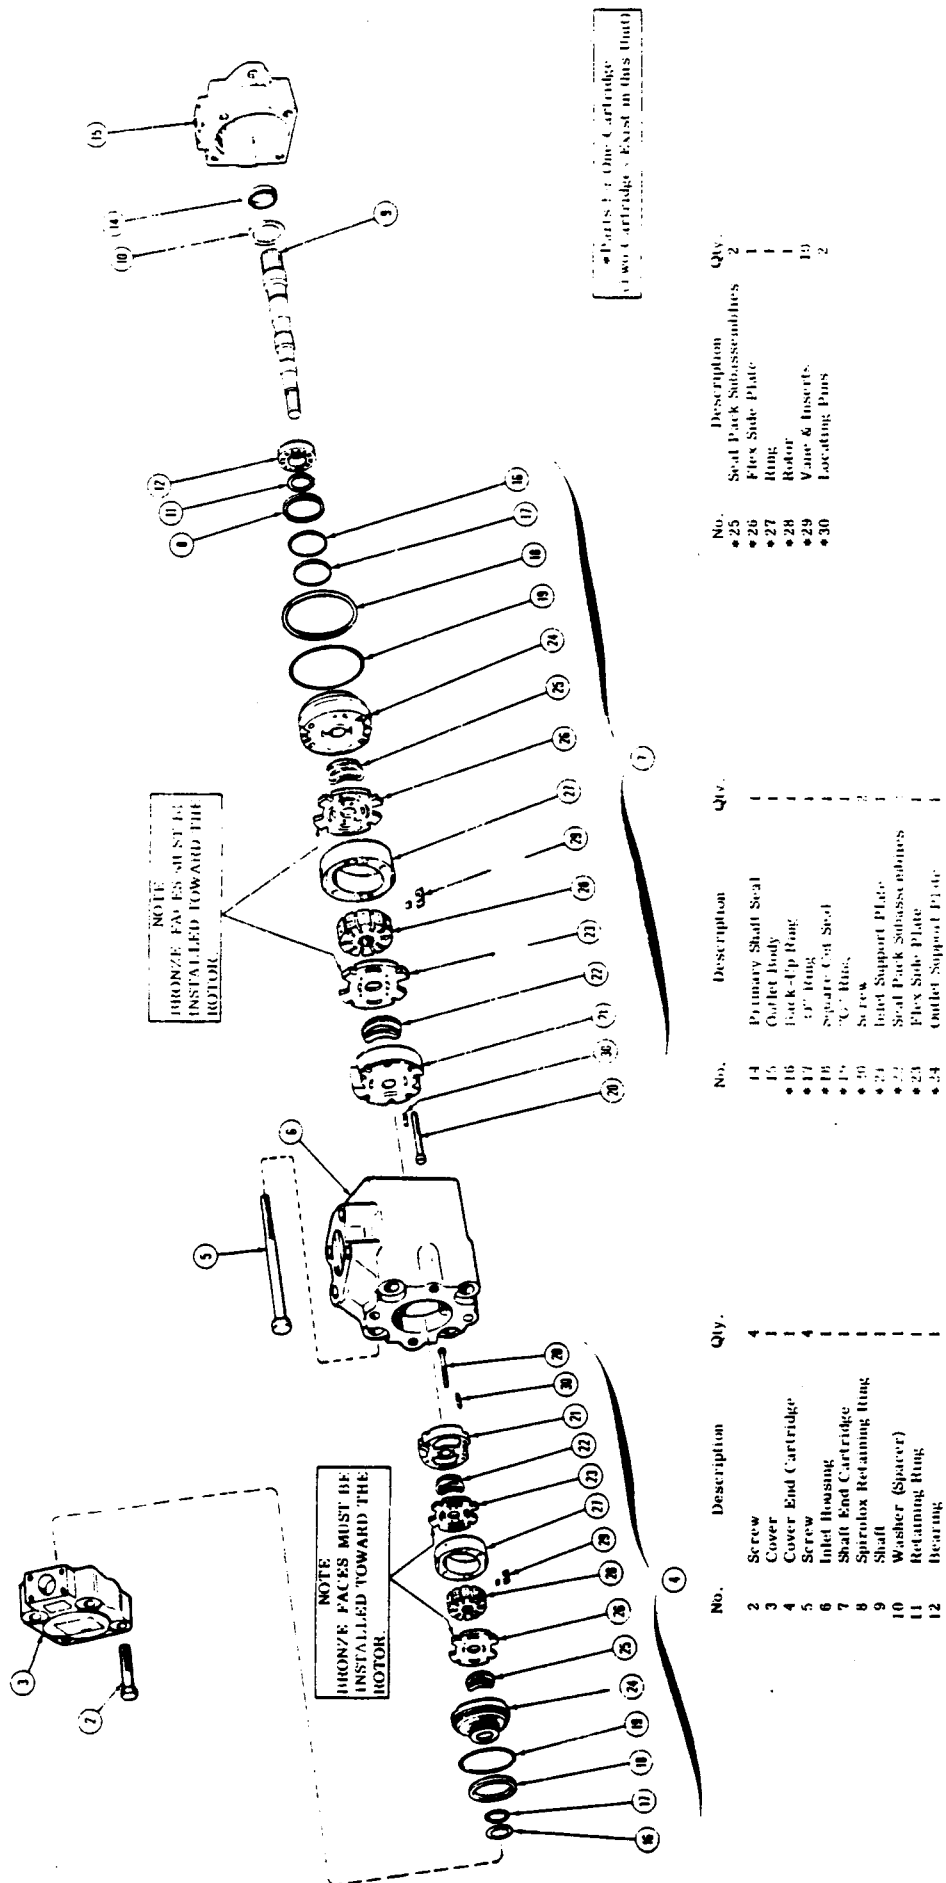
EXPLODED VIEW OF TYPICAL PUMP.
